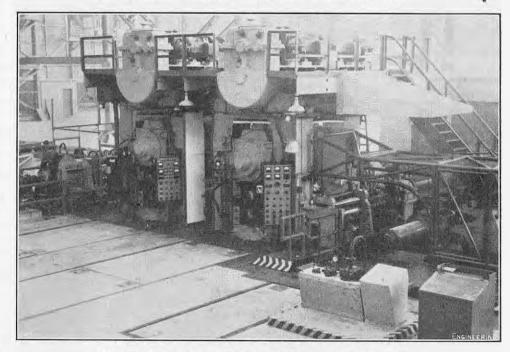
EXIT END OF TWO-STAND TEMPER ROLLING MILL.
